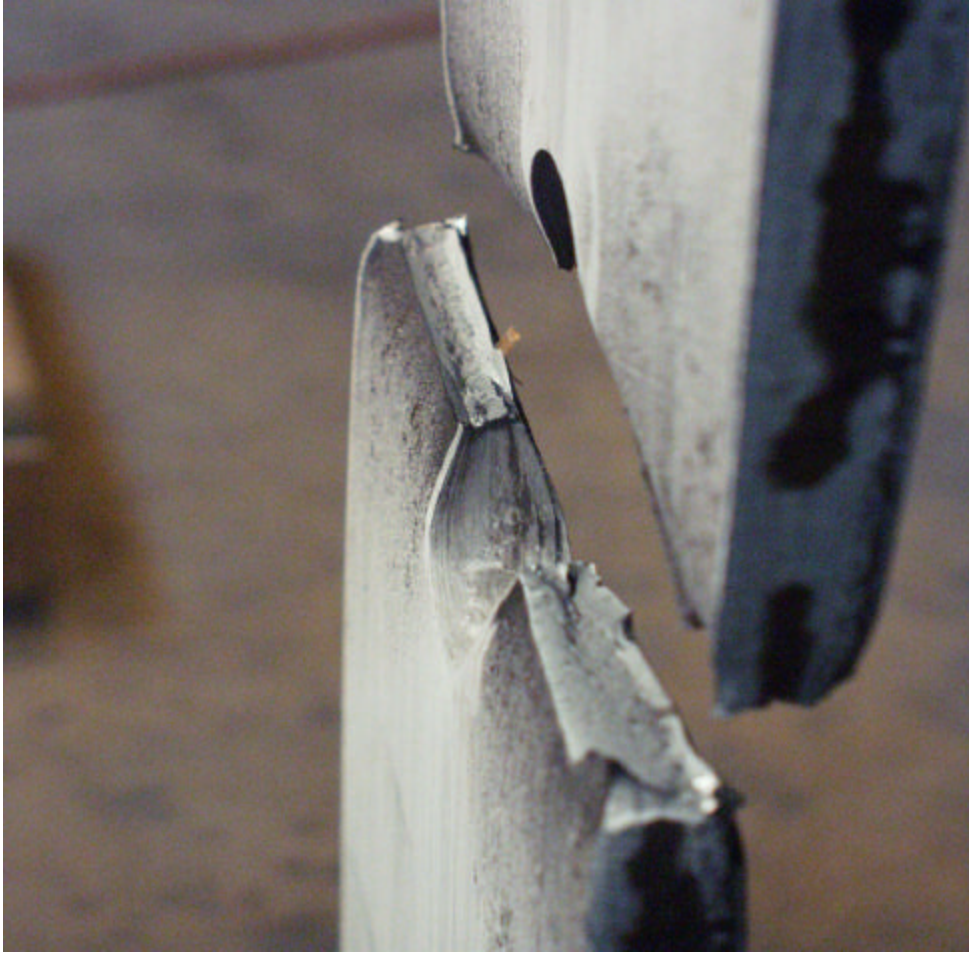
Fracture Surface of HPS70W-0.9-L Specimen
